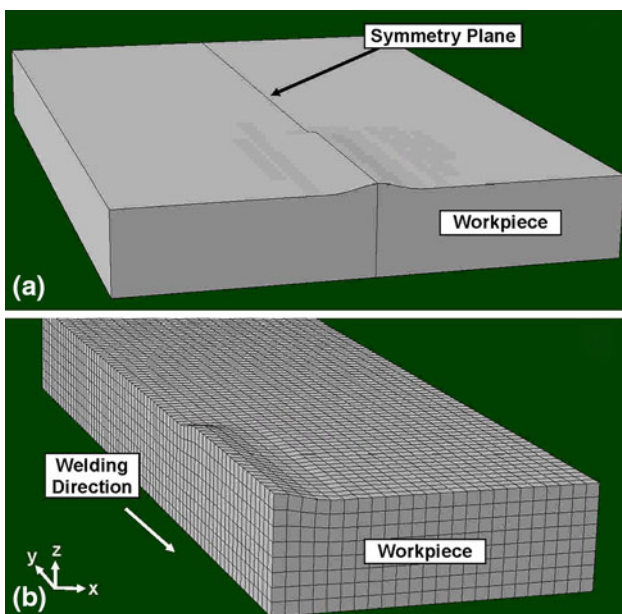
Typical: (a) geometrical (after reflection across the weld boundary); and (b) meshed models used in the thermomechanical GMAW process module
